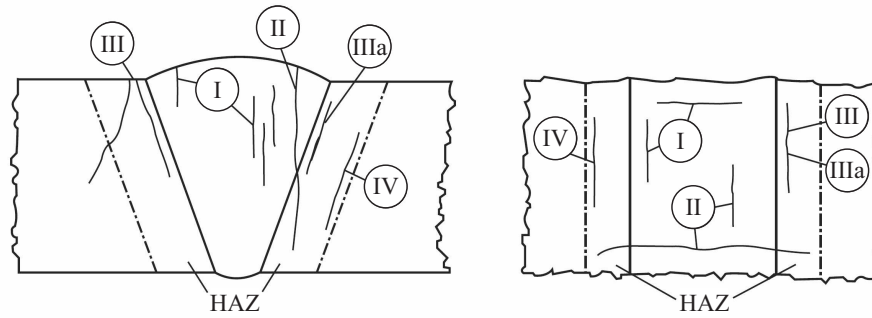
Schematic of cracking modes in weldments of heat-resistant steels, after [13]
